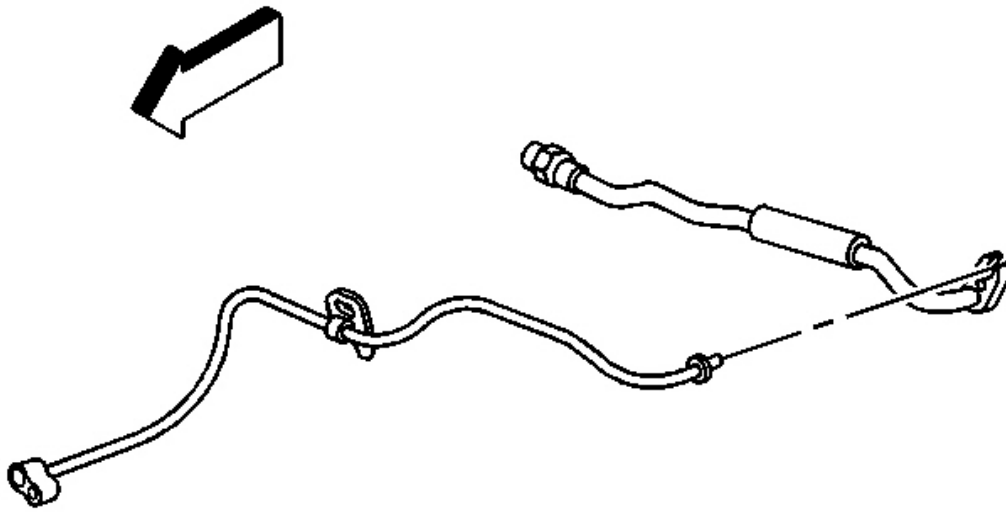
Accumulator Hose Bracket & Rear Evaporator Tube
